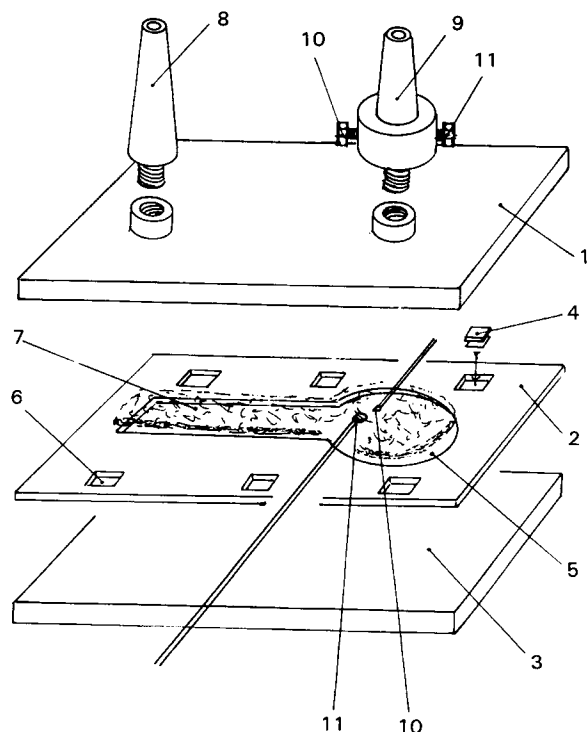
Exploded view of mold: (1) front plate; (2) frame plate; (3) back plate; (4) spacers; (5) cavity; (6) spacer hole; (7) fiber mat; (8) vacuum nozzle; (9) polymer feed nozzle; (10) temperature transducer; (11) thermocouple.
